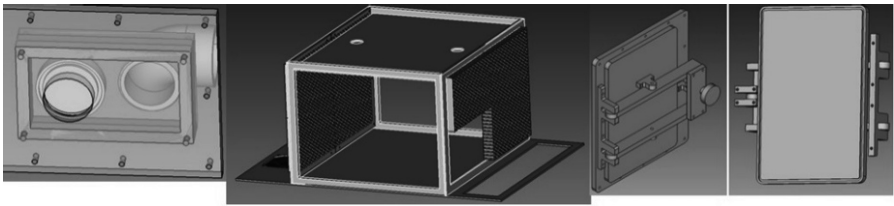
Mounting of the exhaustion valve, interior of the chamber and door
